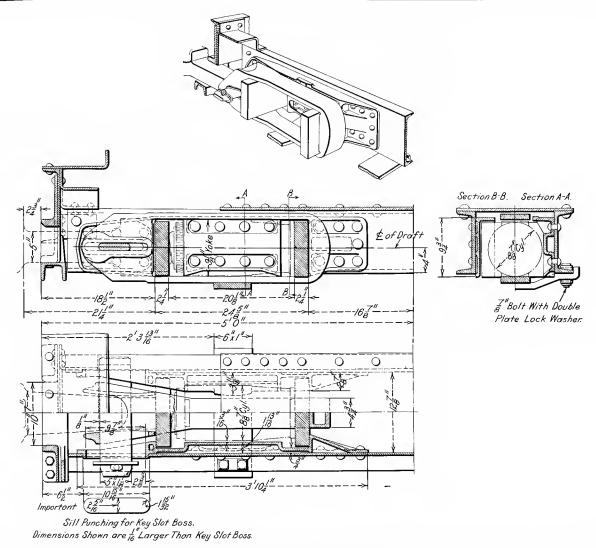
Universal Attachments and Yoke for Westinghouse Friction Draft Gear. Universal Draft Gear Attachment Company.
